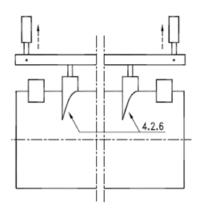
Location of mechanical hazards on a two roll mill shown with a strip cutting device and a stock blender
